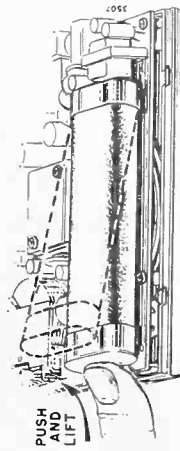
View Showing Method of Removing Later Type Battery Holder From Chassis Board.
